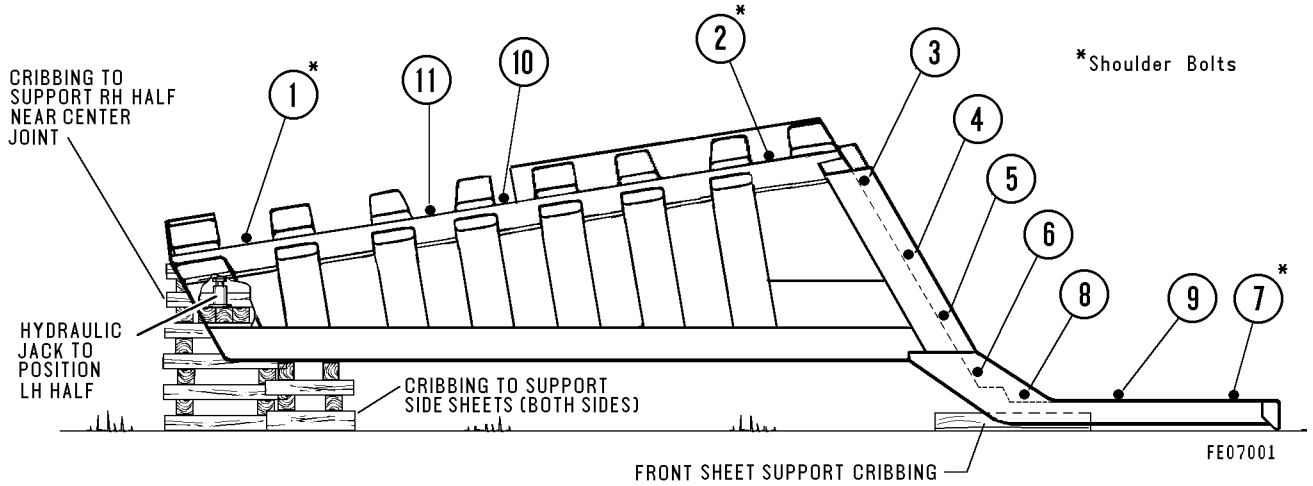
BODY ASSEMBLY HARDWARE INSTALLATION SEQUENCE
